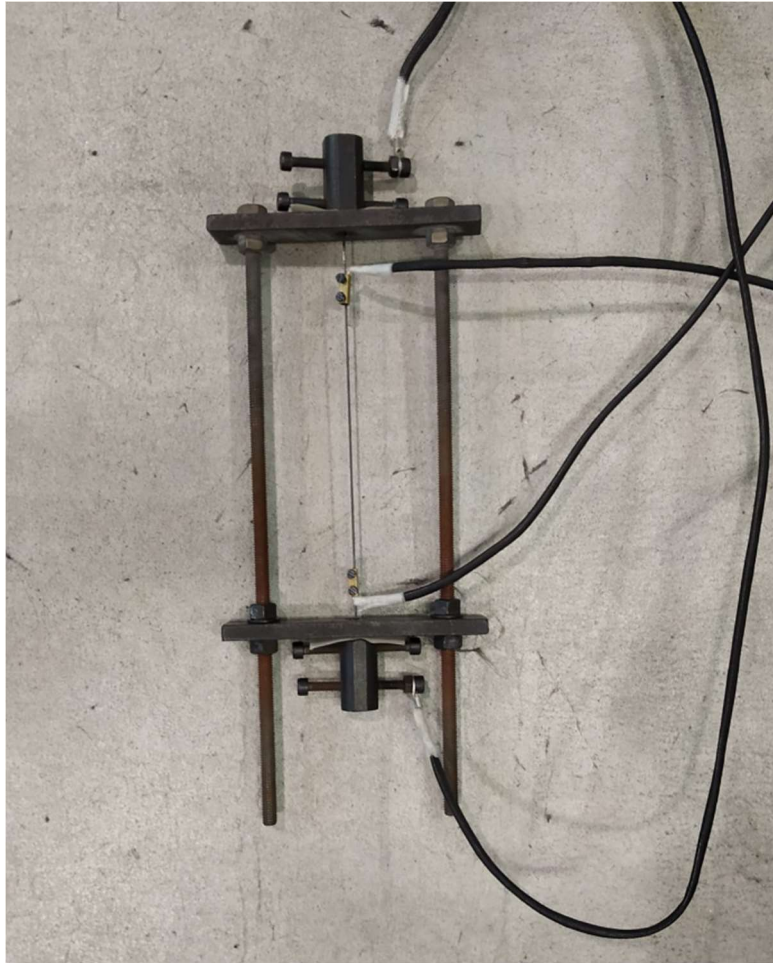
The jig employed to heat treat (ageing) the SMA wires.
